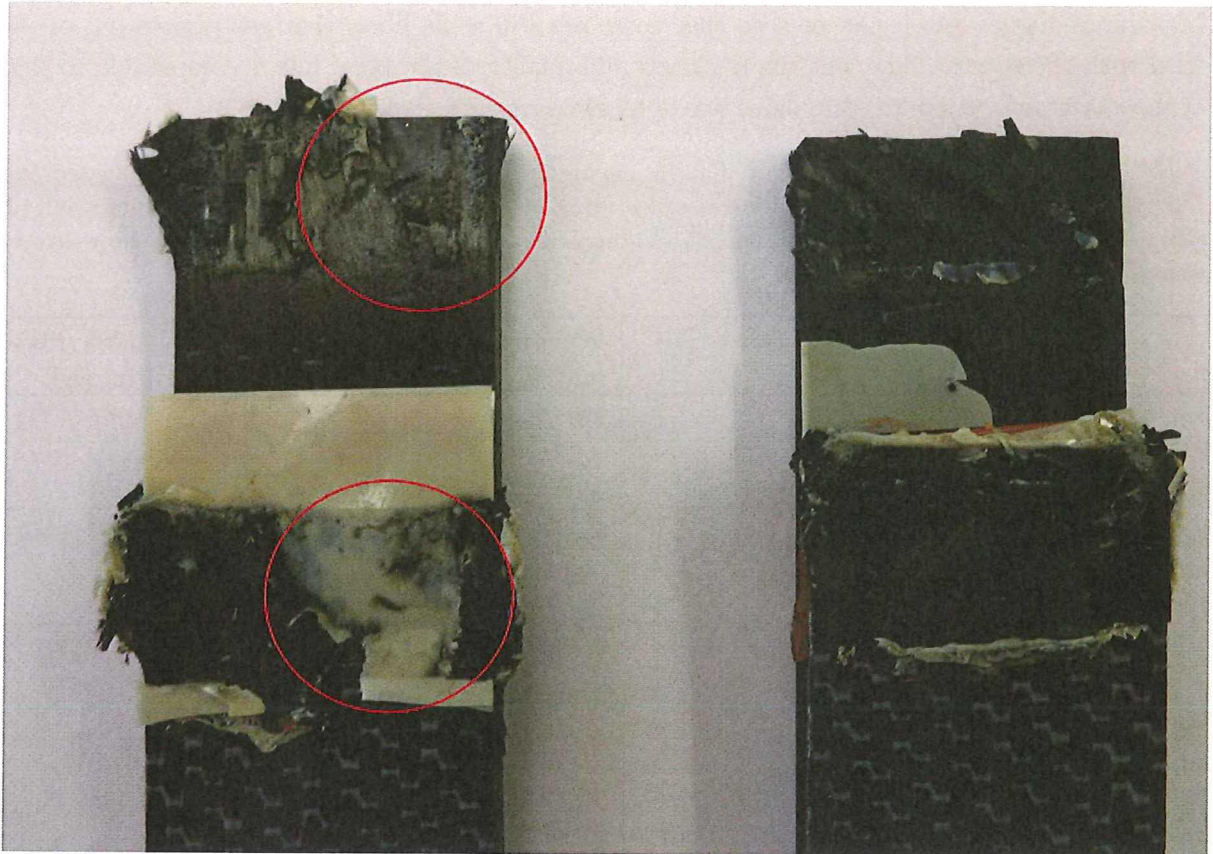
| Welding surfaces of weave to chopped material welded samples #52 (left) and #53 (right) (appendix B), highlighting the poorly welded area of the overlap for sample #52
